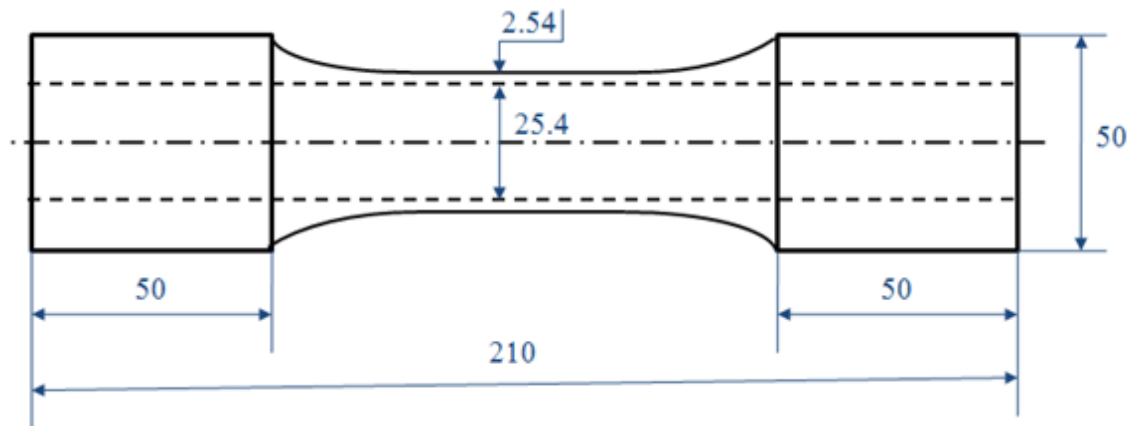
Geometry and dimensions of 1045 HR tubular specimens [86]. All dimensions in mm
